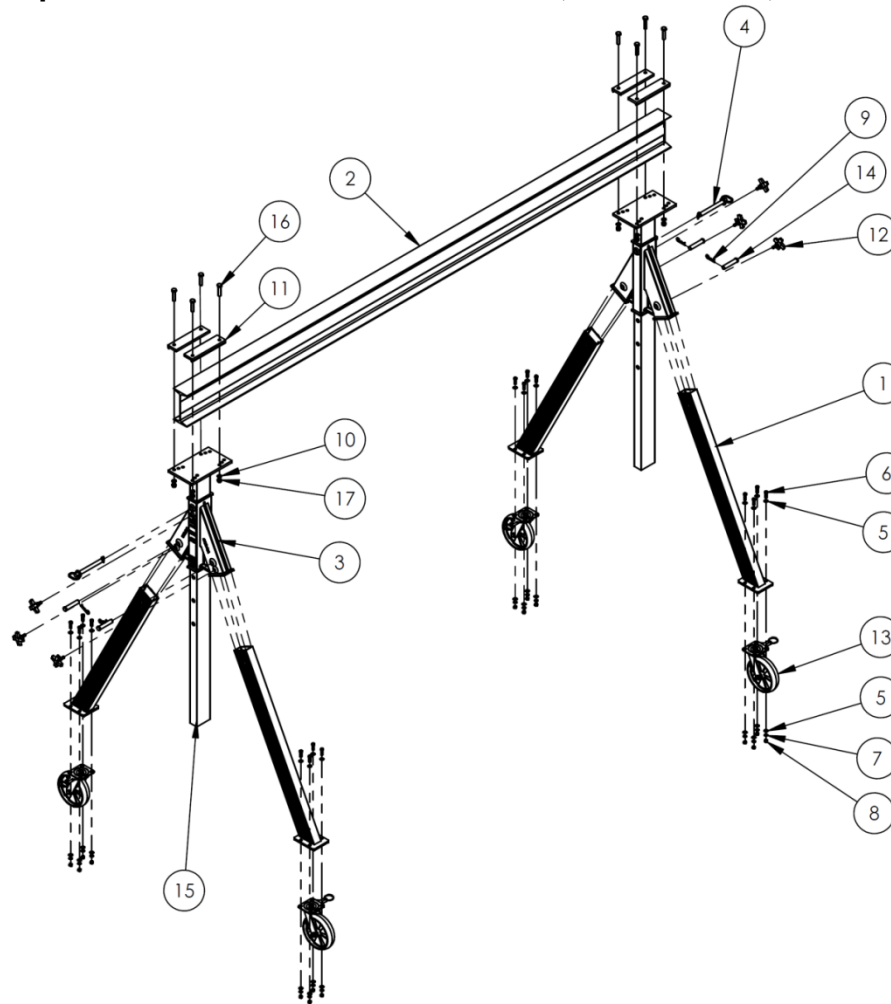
Exploded view of models AHA-2-8-8, AHA-2-8-10, & AHA-2-8-12
